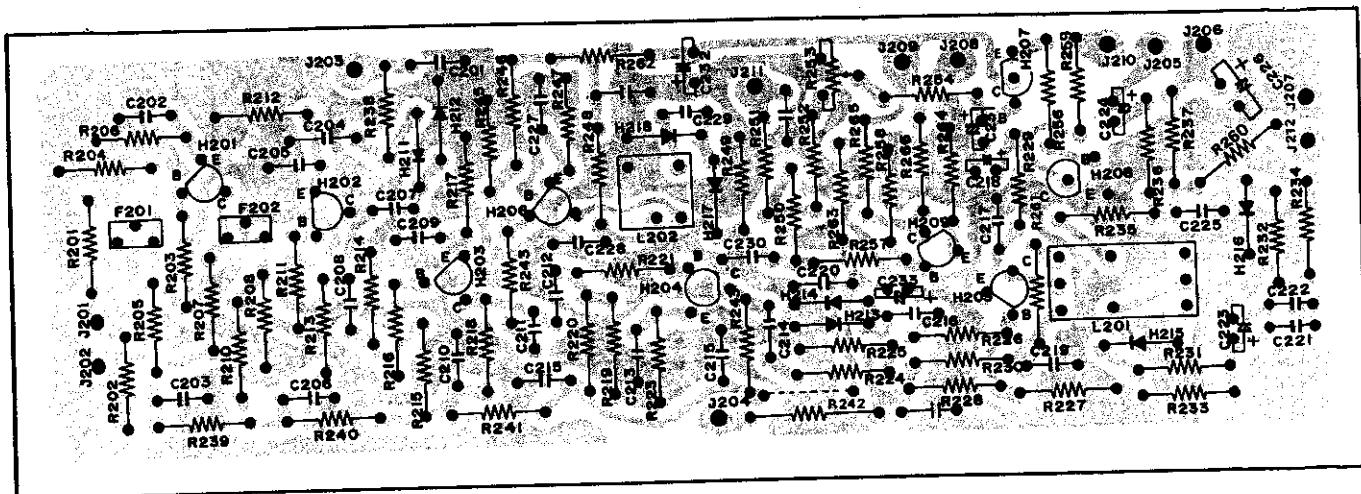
FM Front End and AM Tuner Assembly P100 Component Locations
